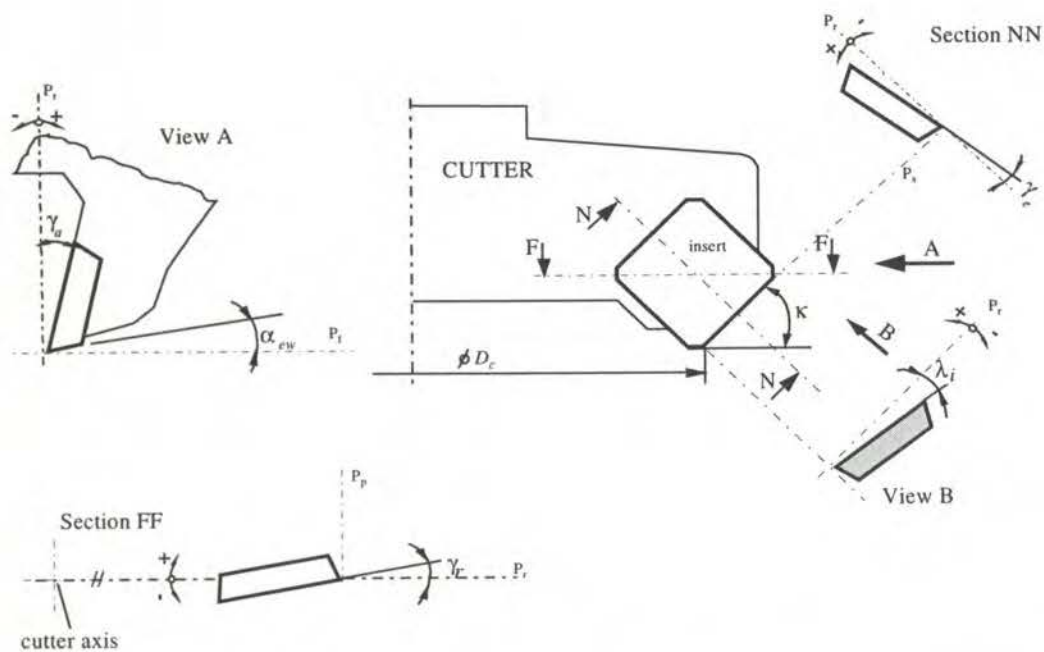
The location of primary and secondary cutting edges of a face milling cutter
